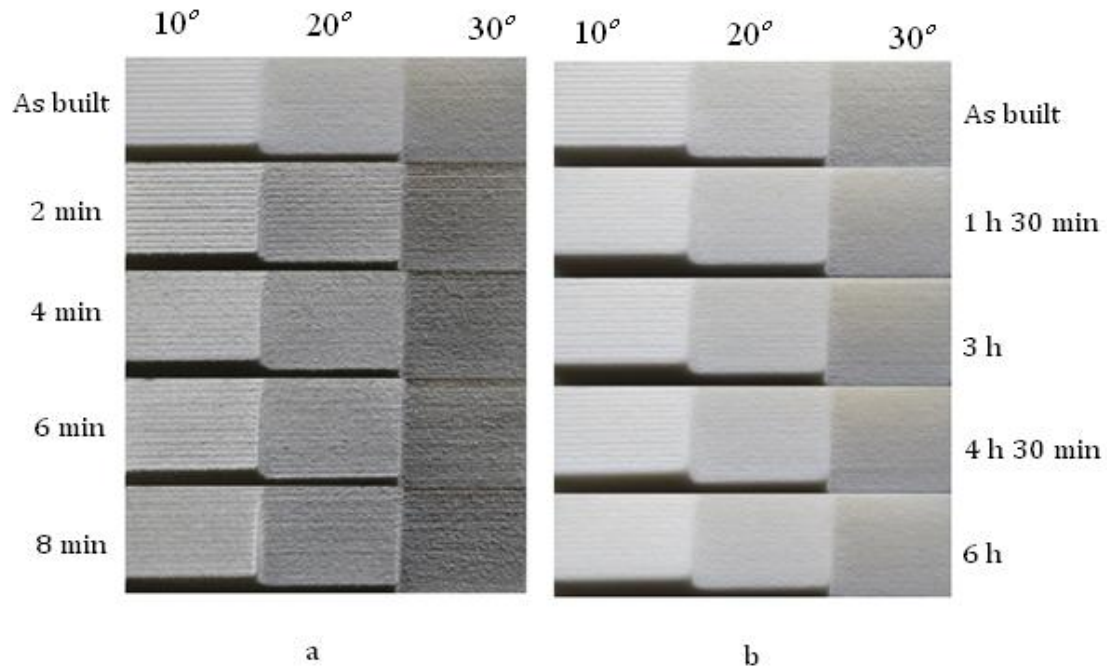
Improvement of surface finish of nylon test pieces through shot peening (a) and tumbling (b)
